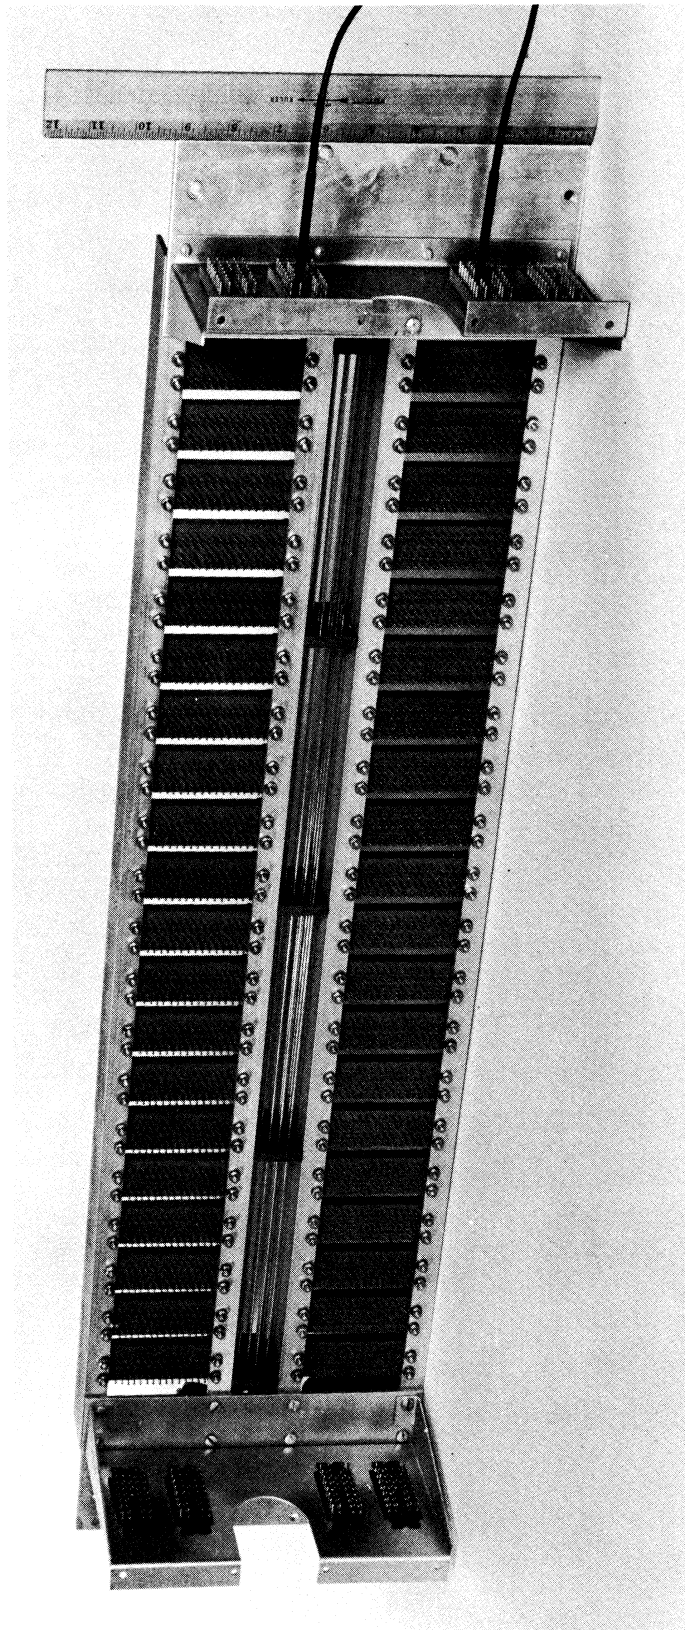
9B IMPROVED CHASSIS (REAR VIEW)
